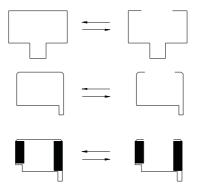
Cross section dimensions and shape (open profile to closed profile and vice versa)
